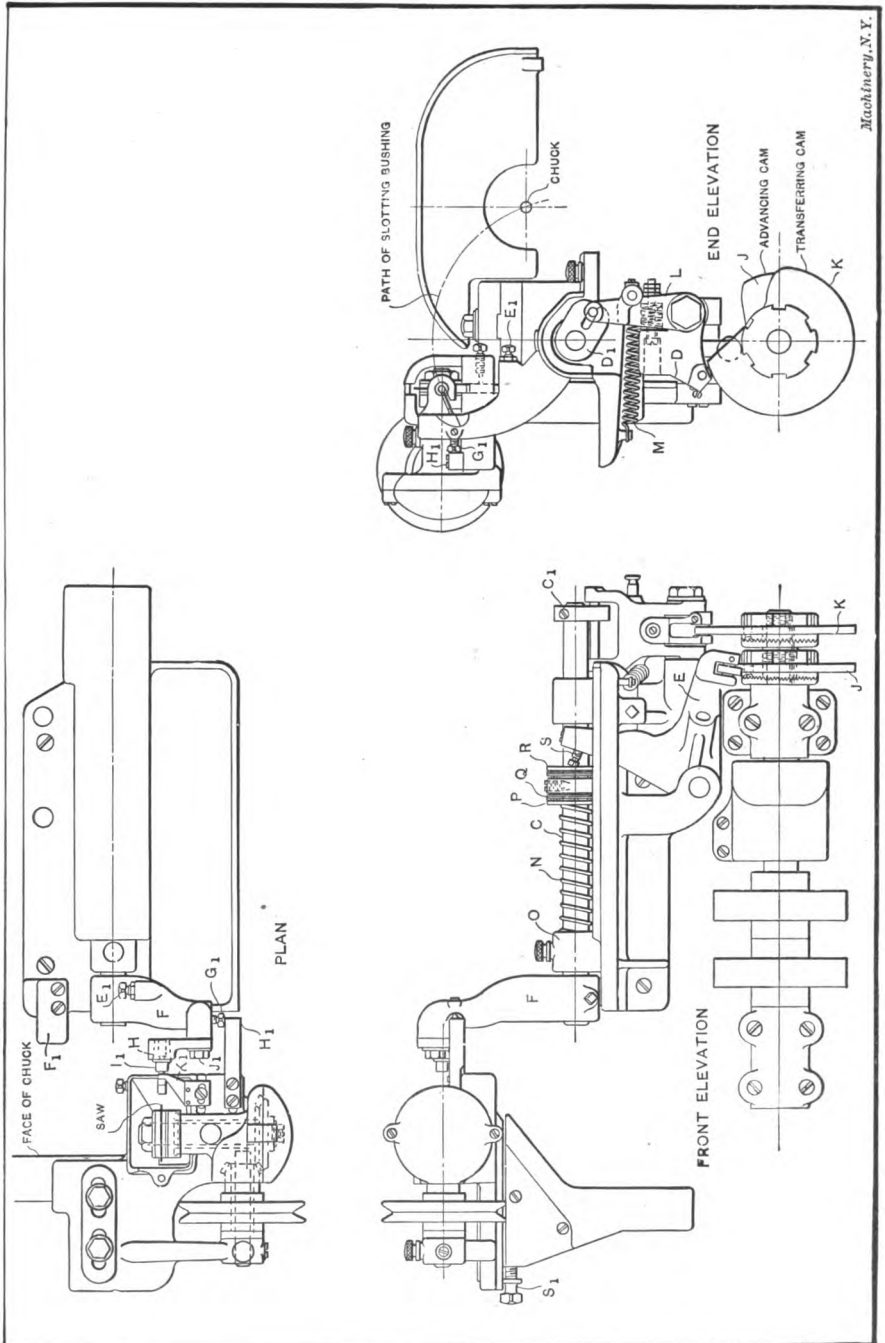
Assembly Views of Screw-slottting Attachment for the No. 00 Brown & Sharpe Automatic Screw Machine
